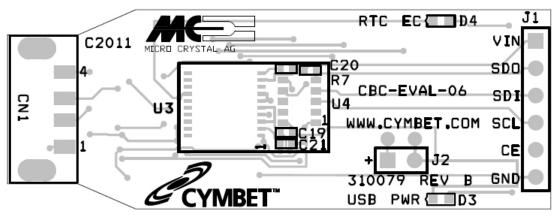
CBC-EVAL-06 Assembly Diagram (Top View).
